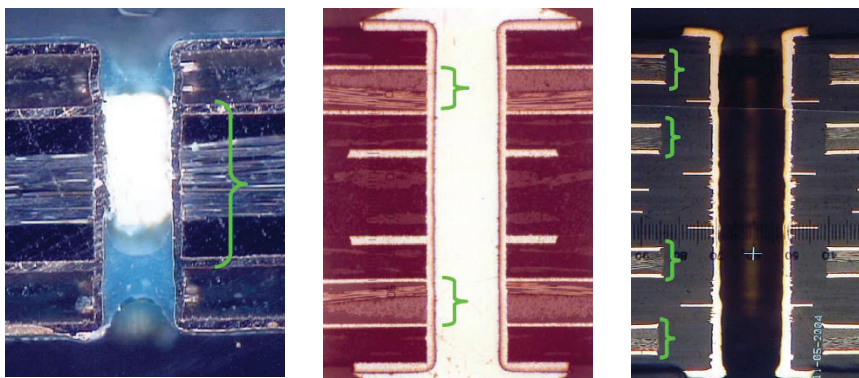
Stablcor Carbon Core Laminate highlighted in PCB stacks. From left to right: 3-layers 1-core board, 2-layers 2-cores board, and 12-layers 4-cores board (property of Stablcor Technologies Inc.).
